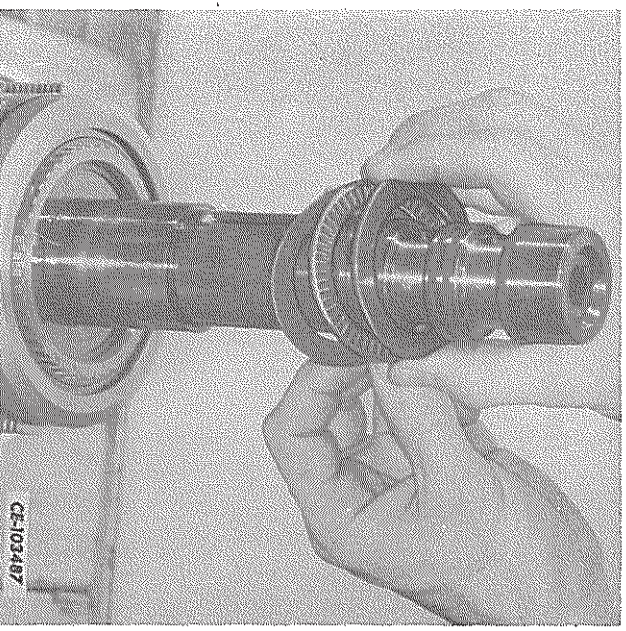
Removing the Thrust Washers and Thrust Bearing
